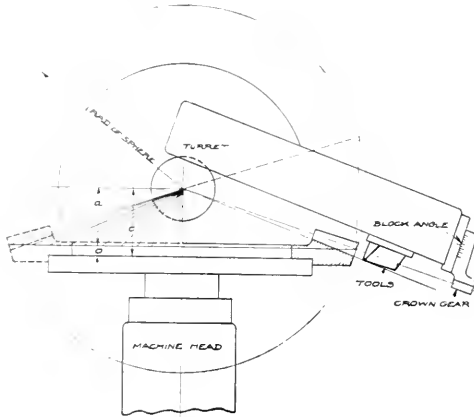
BACK CONE DISTANCE ON GEAR-TOOTH GENERATOR
